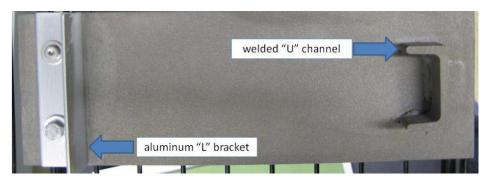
Multimetal galvanic test specimen prior to pretreatment and paint
